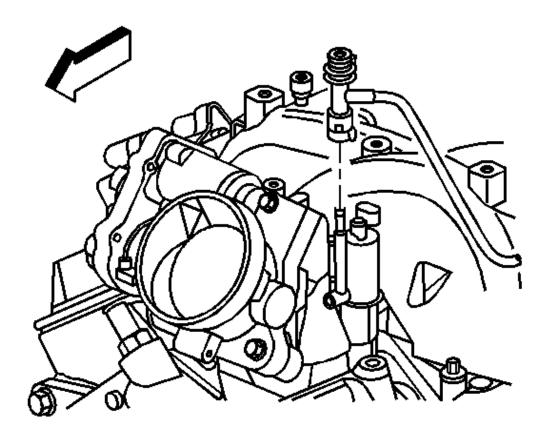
View Of EVAP Purge Tube At Purge Solenoid Courtesy of GENERAL MOTORS CORP.
